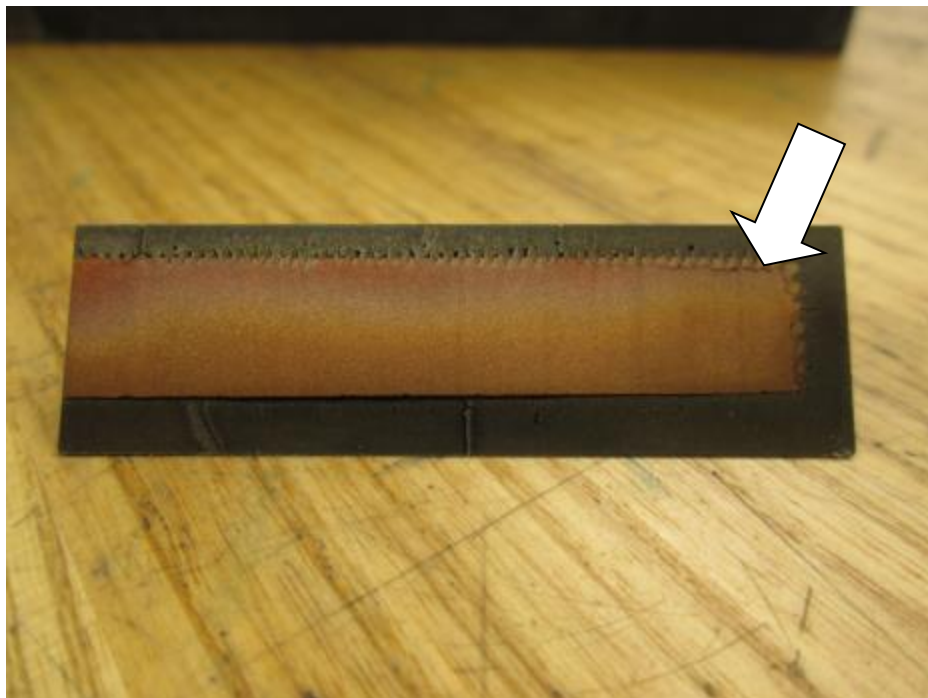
Close-in view of the cut corner surface. Side 1 is the H13 clad surface under the copper in the photo, and side 4 is on the top of the copper (sawtooth pattern visible).
